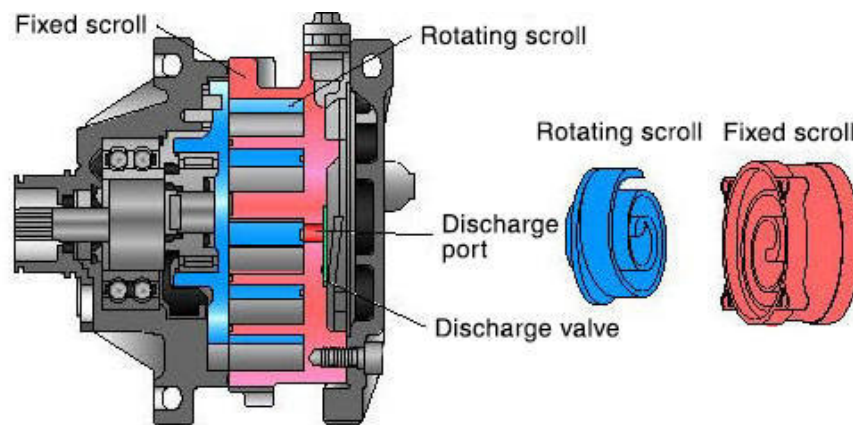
Scroll compressor cutaway showing the interlocking rotating and fixed scrolls (credit: Toyota Industries)
